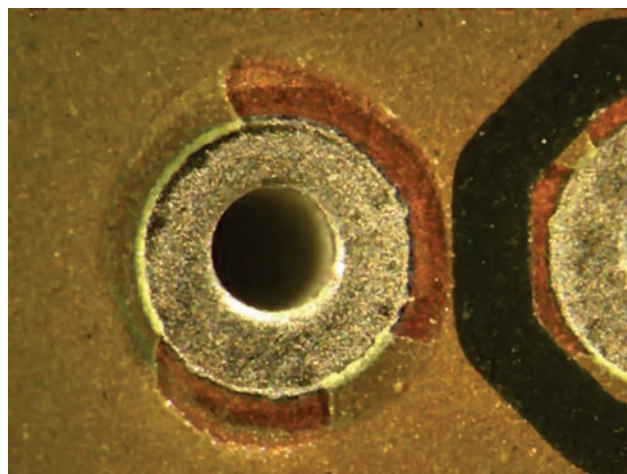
Microscopic inspection of the surface of the PCB reveals faulty solder resist. Underetched films broke off, caused by a bad immersion tin rework.
